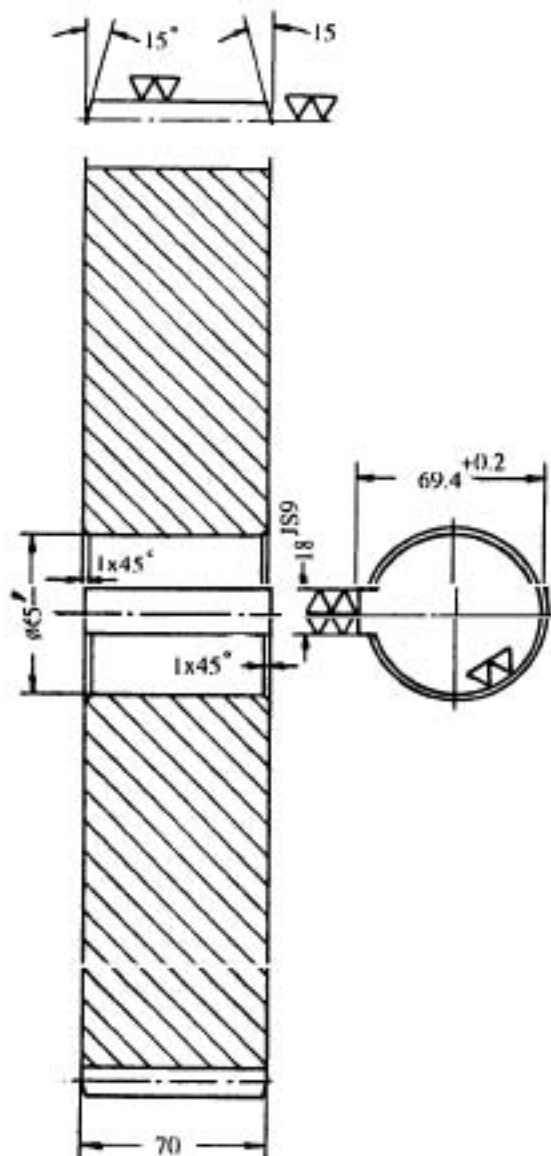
Conventional representation of gear and gear assemblies in engineering drawings
